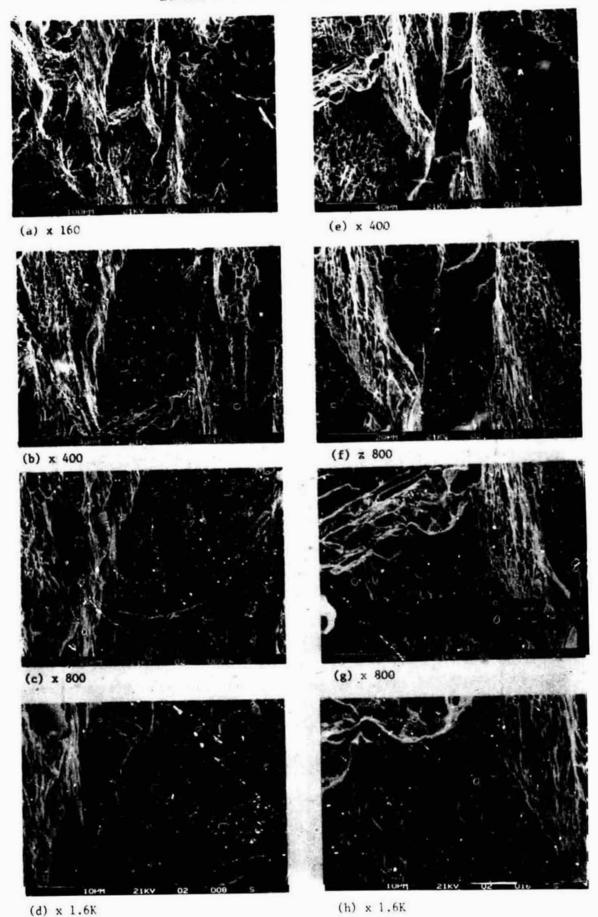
STEREOSCAN VIEWS OF -275F CHARPY FRACTURE SURFACES OF SENSITIZED N-40 (SCVL4) & FERRITE ORIENTED PERPENDICULAR TO BAR) (Roll No.2180)
